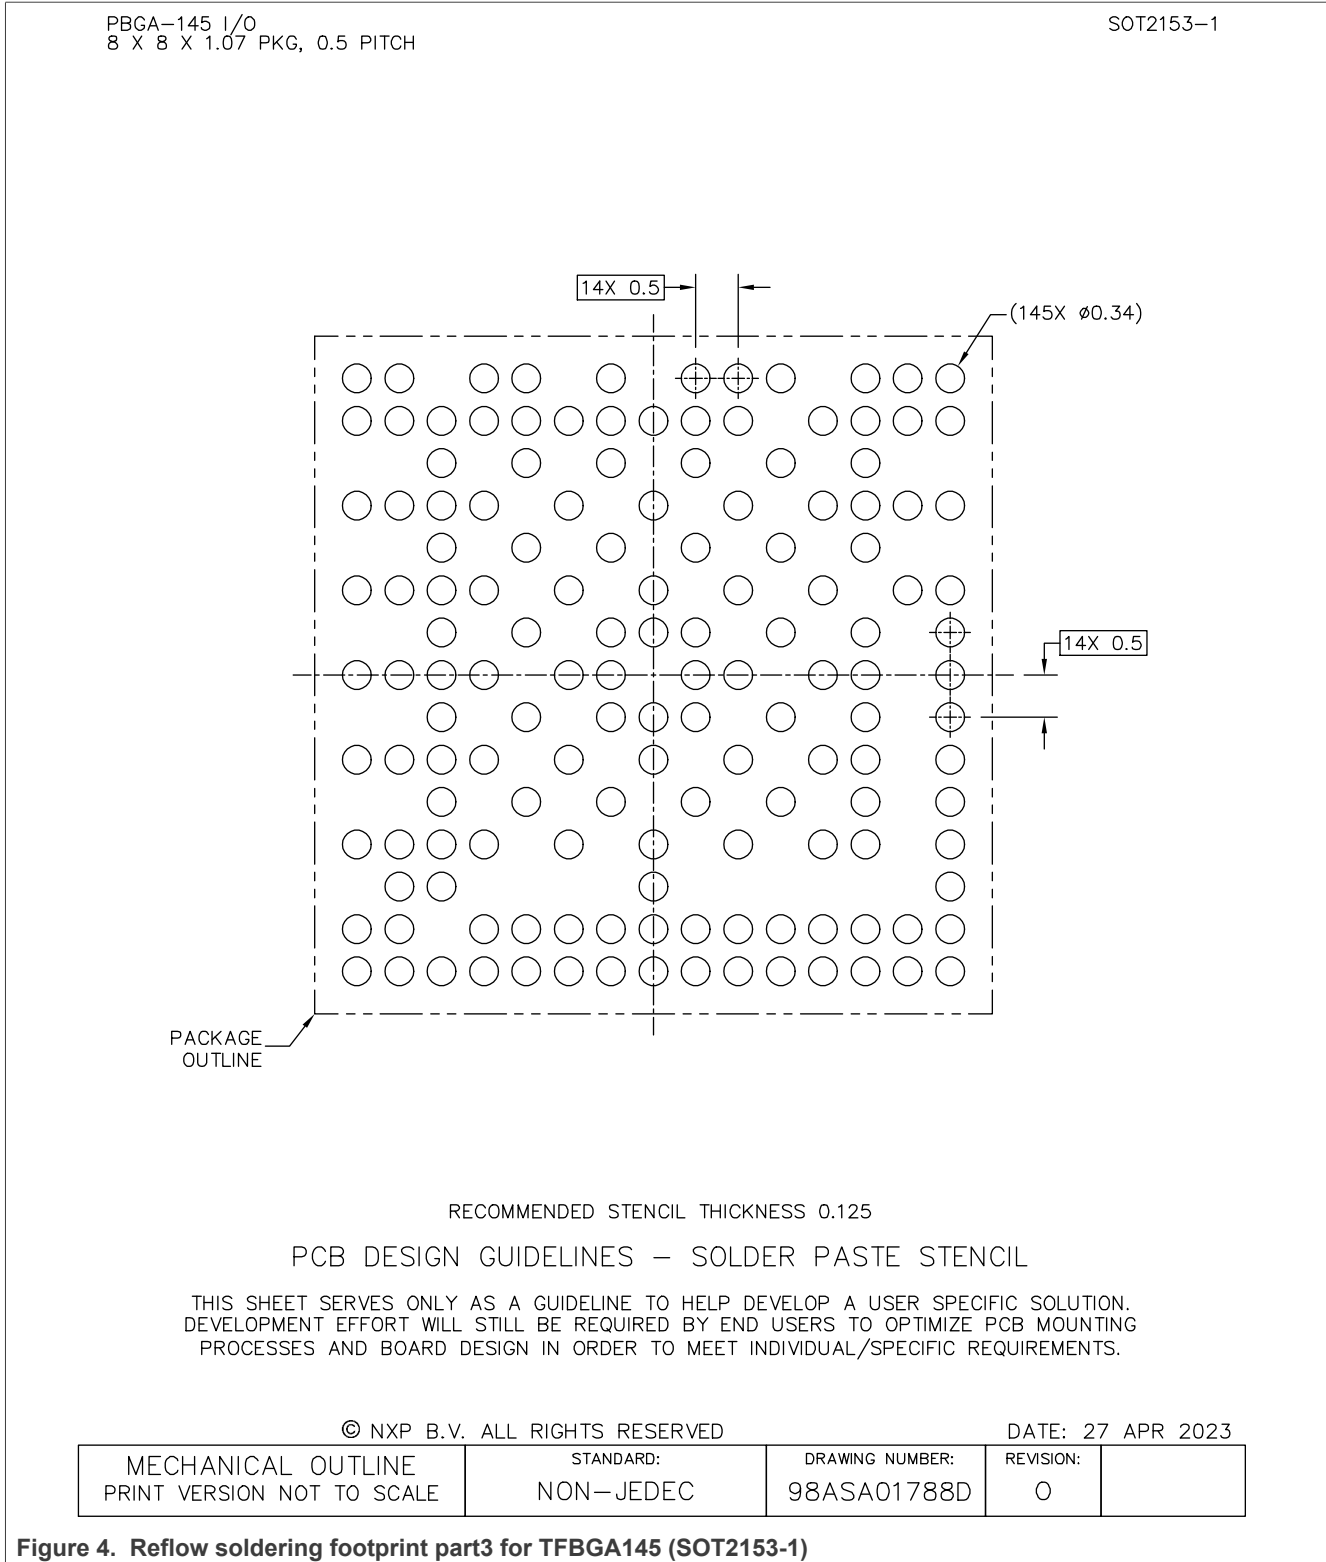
Reflow soldering footprint part3 for TFBGA145 (SOT2153-1)
